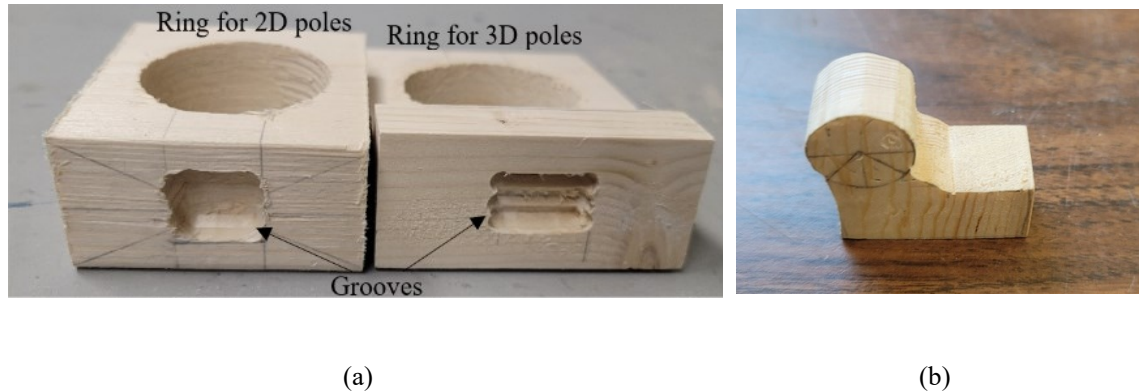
Fabricated (a) load rings and (b) loading knob.
